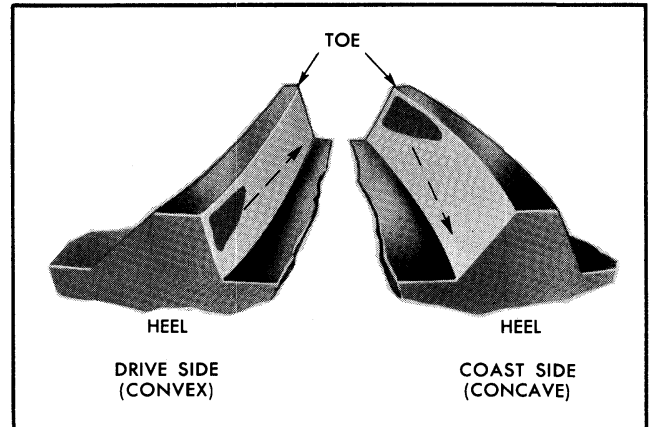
Tooth Pattern - Pinion Too Close to Ring Gear
